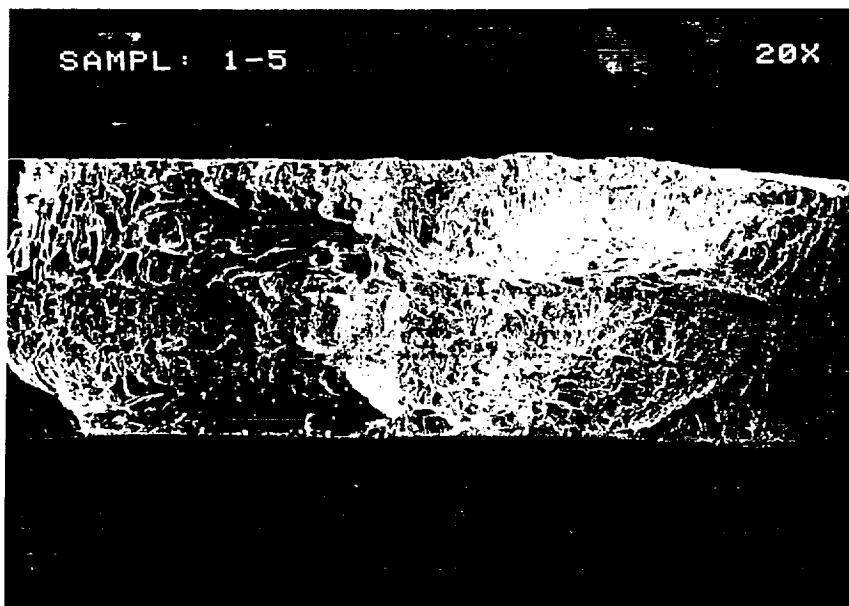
SEM view of fracture in tensile specimen 1-5, 1500F, as deposited. 20X.
